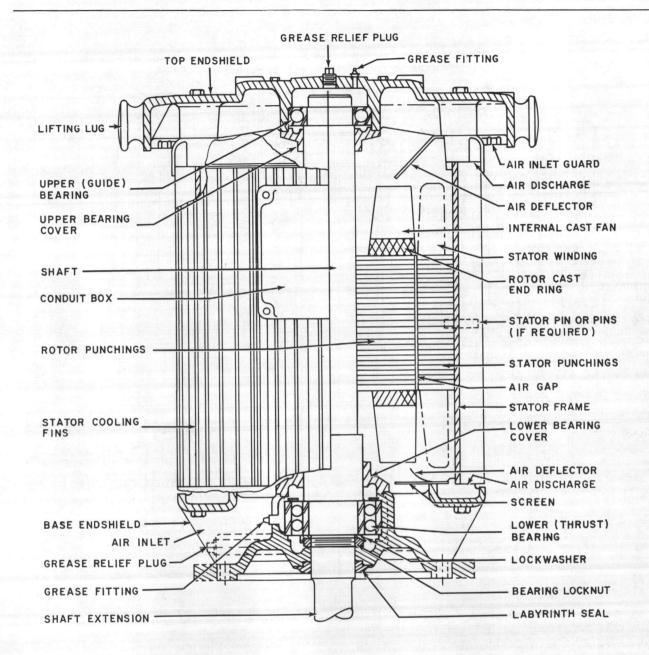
Special lower bearing construction for frames C, D, K254-405 or L213-256
